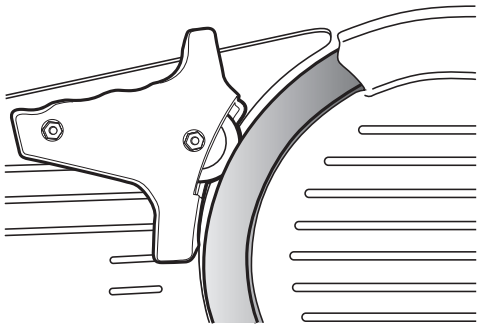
Sharpener in position to sharpen rear facet of blade edge.
